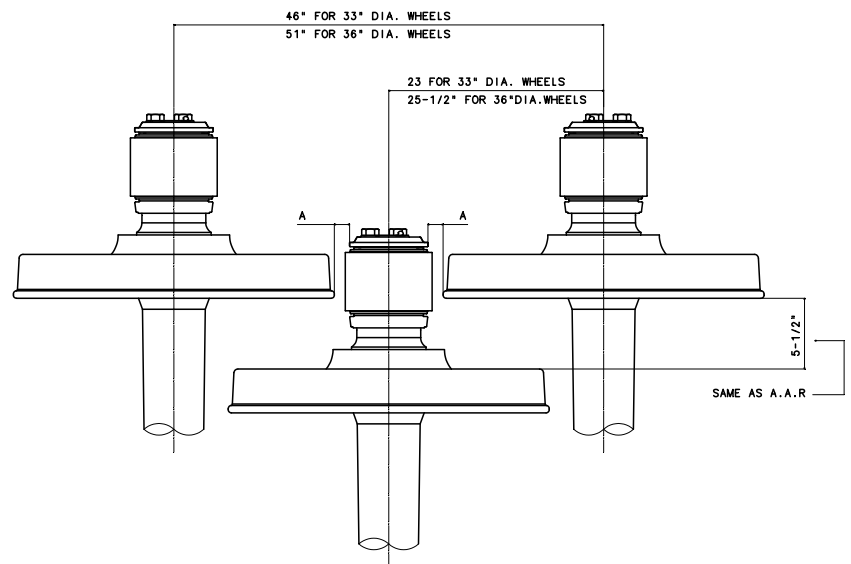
Wheel rack wheel spacing dimensions for shipping wheel and axle assemblies with bearings applied.
